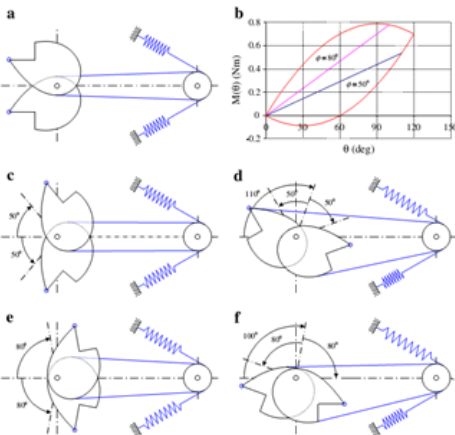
Antagonistic set-up of two linear springs, combined with a quadratic cam mechanism for an adjustable stiffness torsional spring mechanism with linear characteristic. [20]
